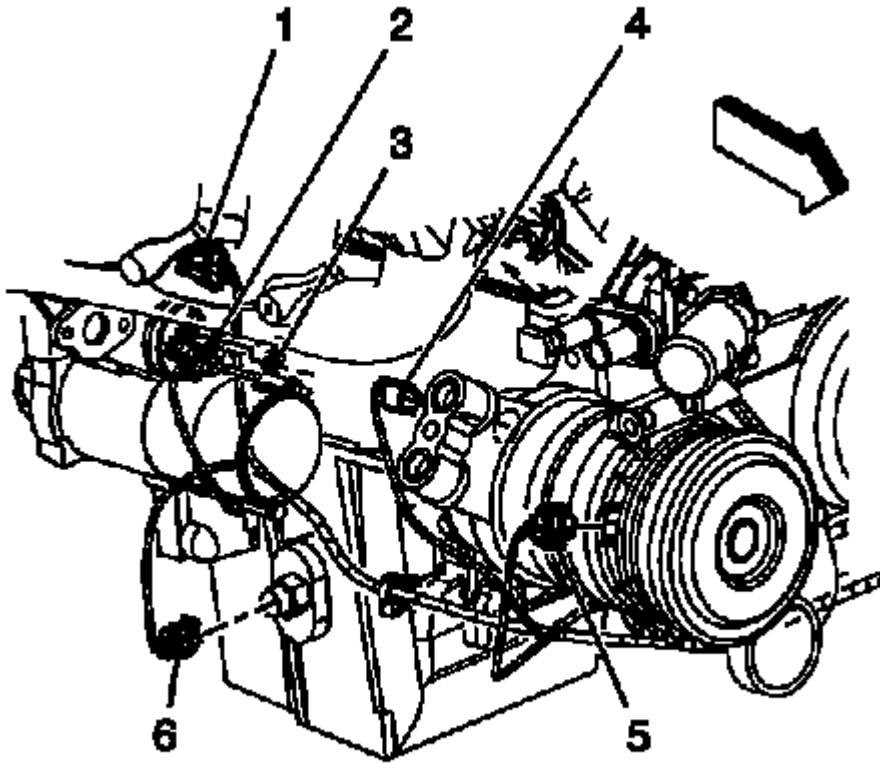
Identifying Electrical Connector (Right Side Of Engine)
